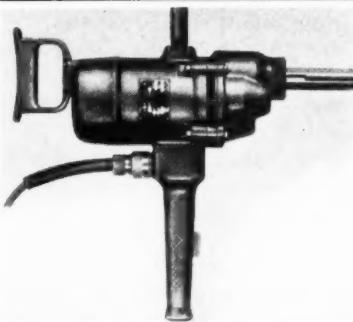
Heavy-duty Electric Drill for Drilling up to 1-inch Holes
